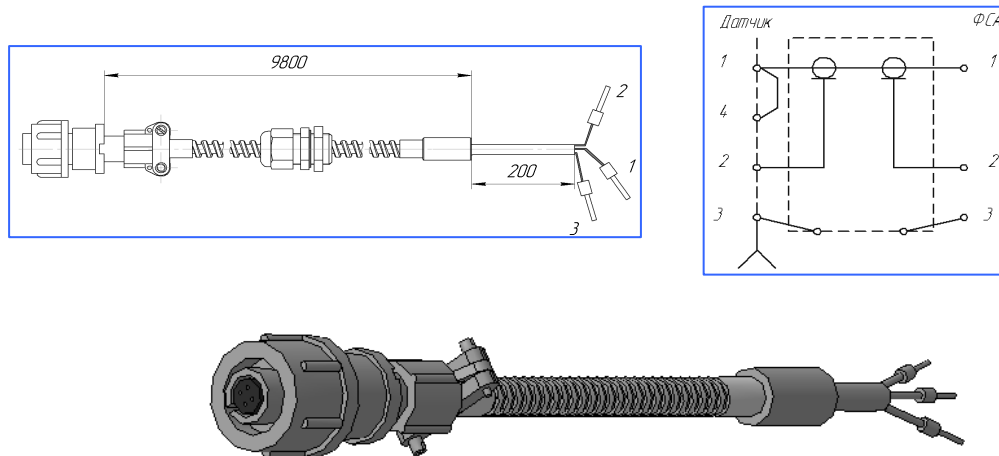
Dimensions and scheme 079-088-125-10 cable.
